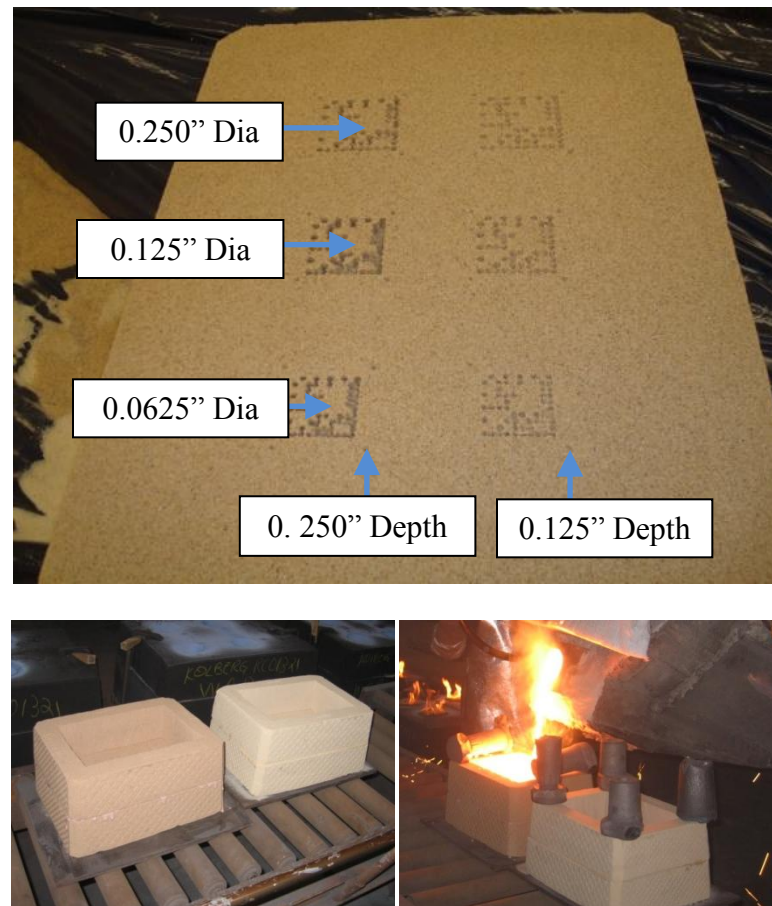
Drag machined with Data Matrix symbols. Cope and drag assembled together prior to being poured.
